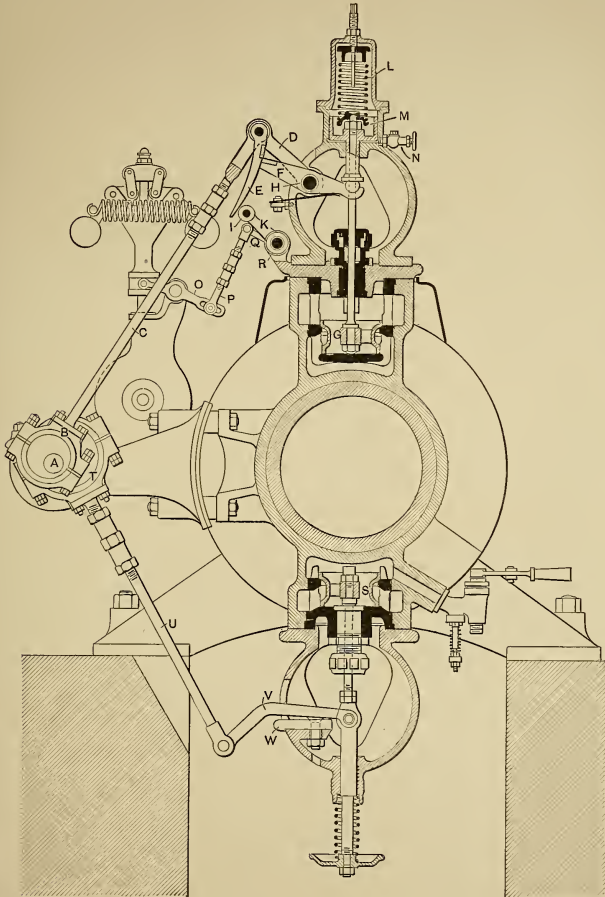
DETACHABLE DROP-VALVE GEAR OF ENGINE BUILT BY MESSRS. DAVEY, PAXMAN & CO., LTD., COLCHESTER
